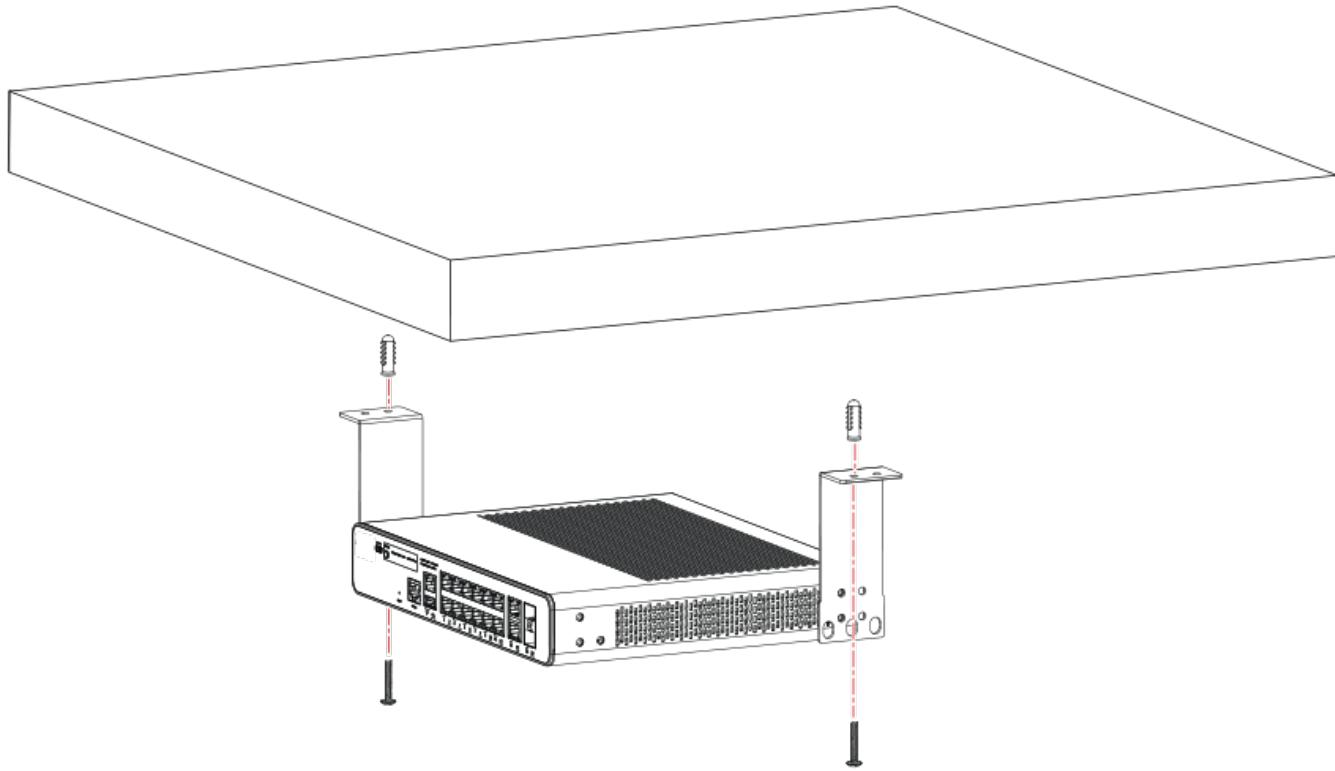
Mounting a compact device under a fixed surface with short brackets (ICX7000-C12-WMK)
